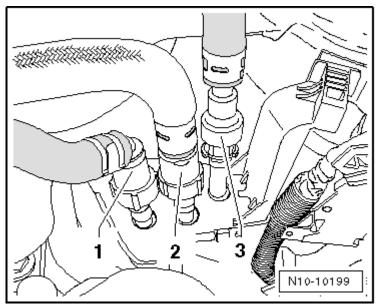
Identifying Breather Line, Vacuum Line & Fuel Supply Line Courtesy of VOLKSWAGEN UNITED STATES, INC.
